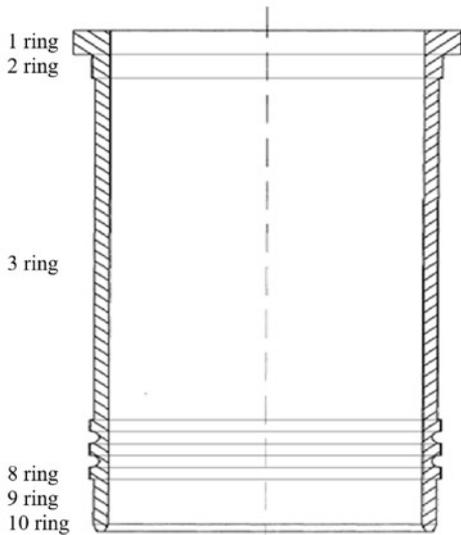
Cylinder liner decomposition for the 4Cz 8,5/11 type engine
